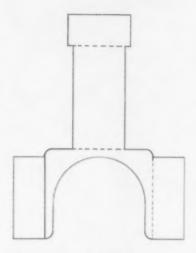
Holder shown half size; dimensions do not call for extreme accuracy.
